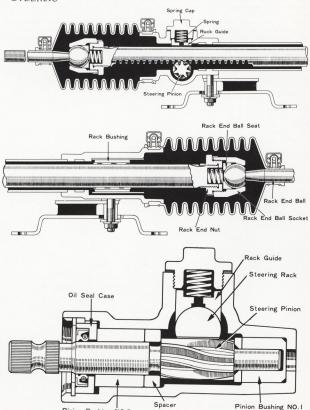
Steering Cross Sectional View Y5287, Y5288, X6195
